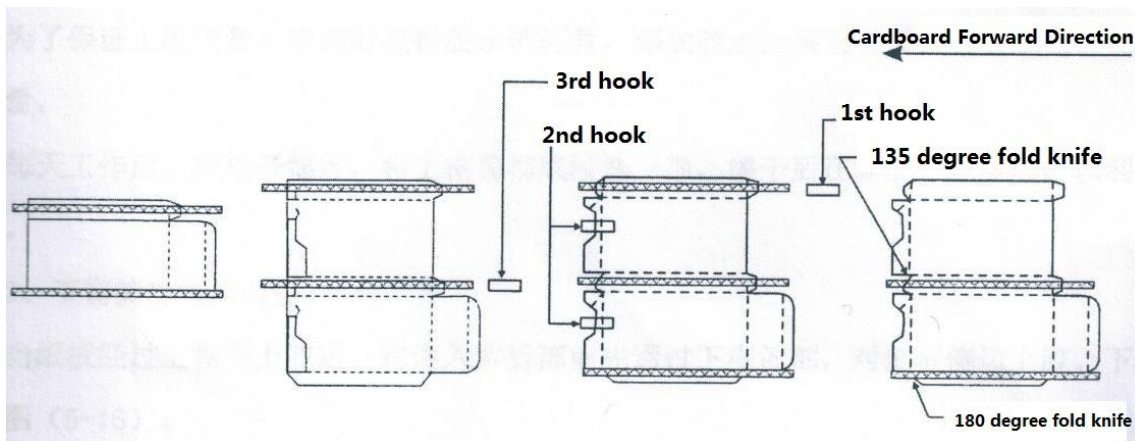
Installation of bottom lock spare parts of 3 group guide board
